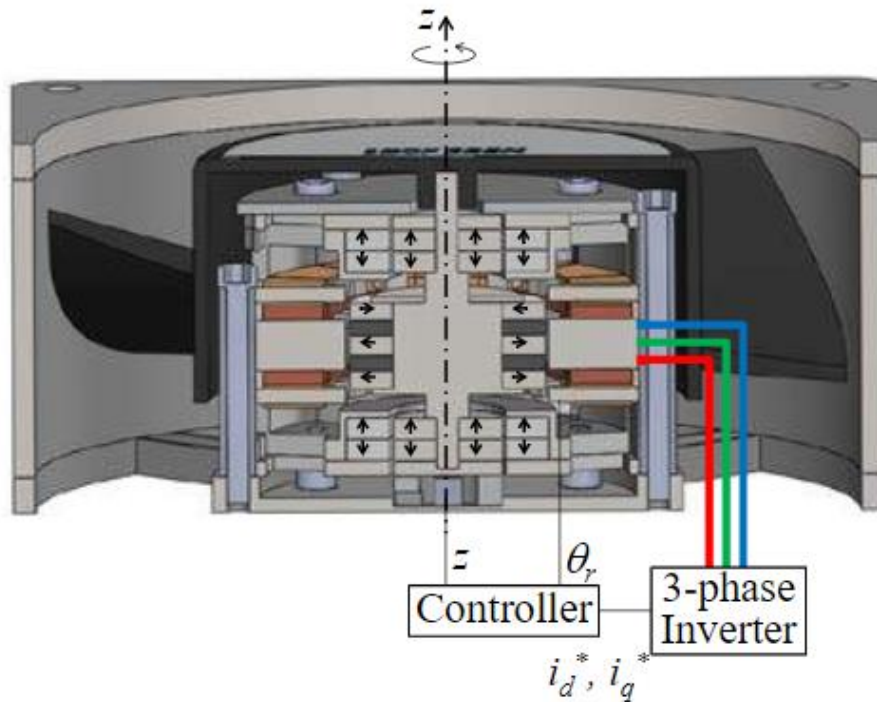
A small cooling fan with one-axis controlled bearingless motor. The bearingless motor installed in the radial direction generates axial force and rotational torque for the rotor.
